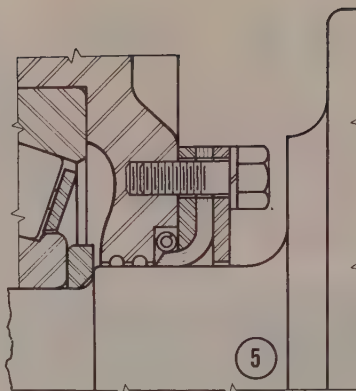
Antifriction bearing of the late 1930 period showing lip and garter spring combined with labyrinth grooves
